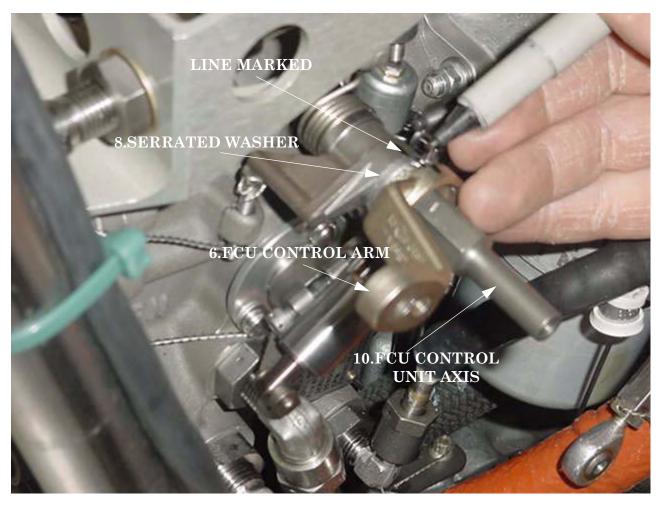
Fuel Control Unit (FCU) - Dead Band Adjustment (Sheet 5 of 6)
